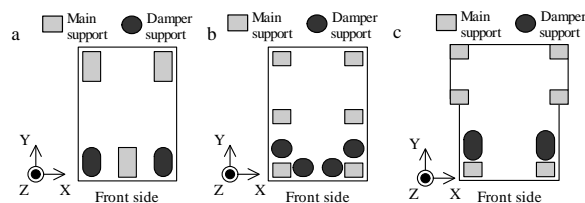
Support configuration used in the experiment; (a) Small machine; (b) Medium machine; (c) Large machine.
